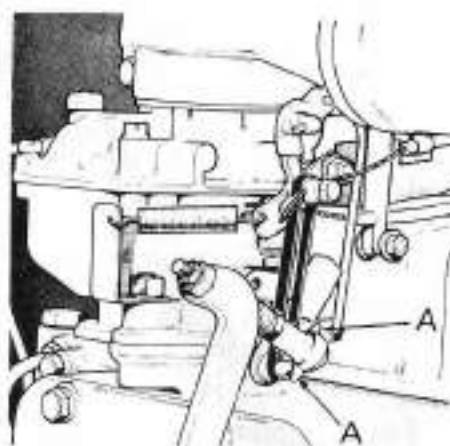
Governor link can be disconnected from carburetor throttle arm after bending tabs (A) back as shown. Throttle arm is then held in position by rubber band placed as shown.
